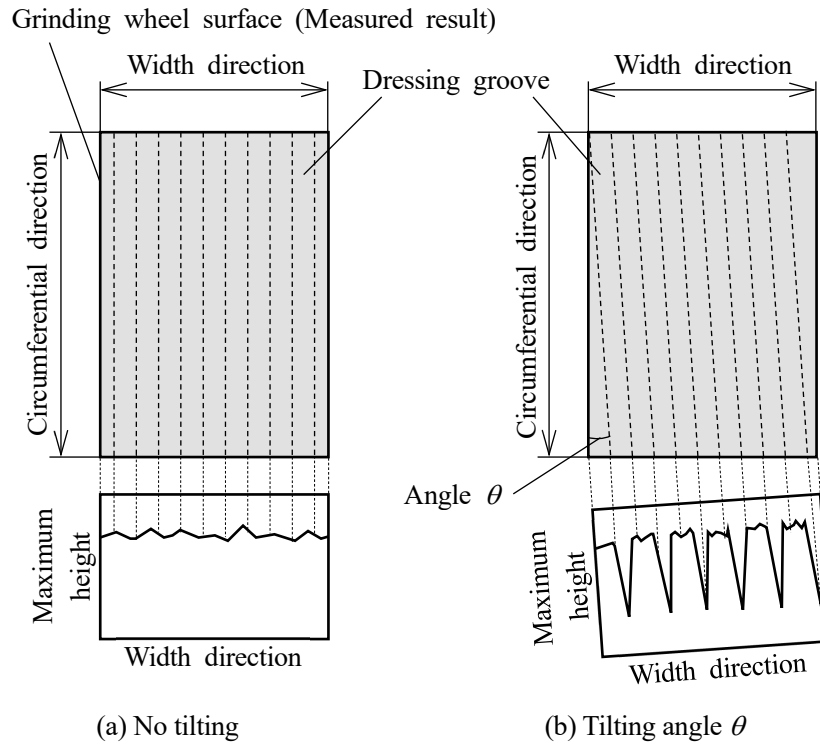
Evaluation method of dressing by projected grinding wheel surface shape
